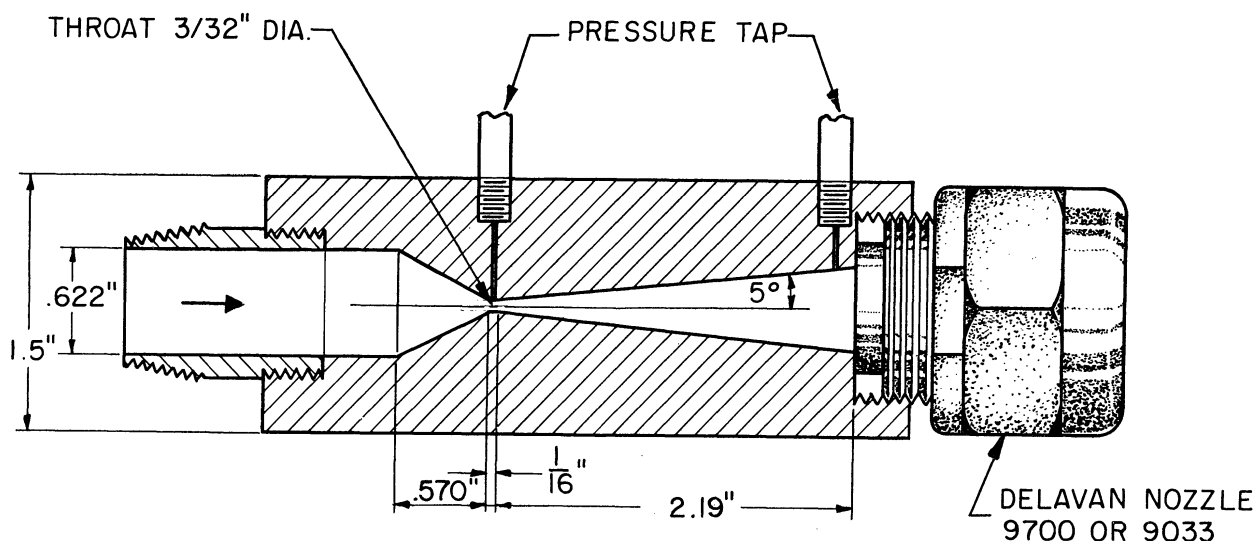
Sketch of cavitating venturi adaptor, Delavan nozzle assembly.
